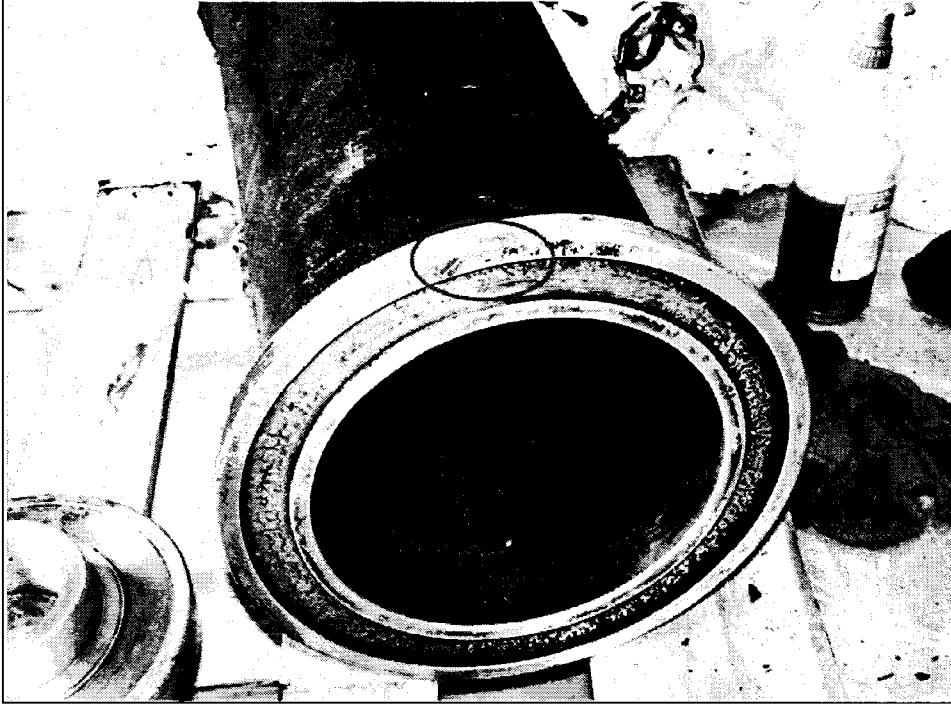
Arc mark on C Phase 230 kV bushing bottom plate which connects the draw lead sleeve to the shield assembly
